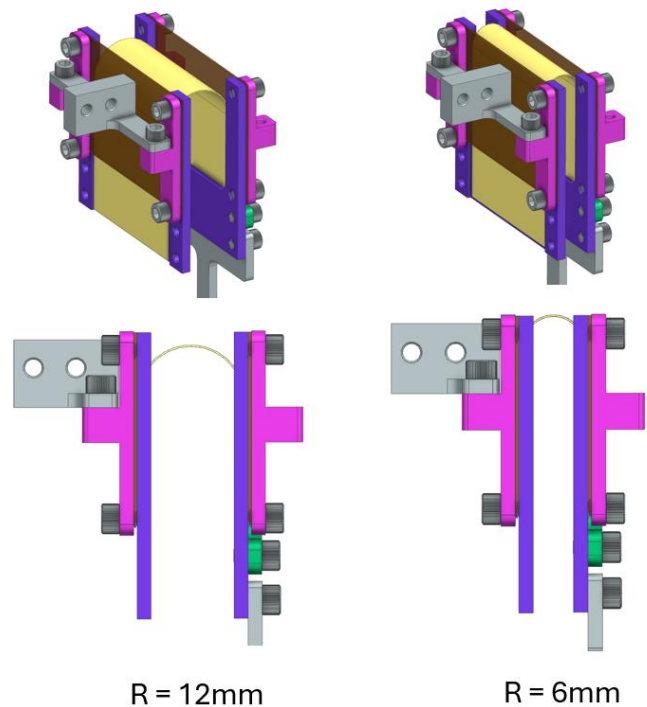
Variable adjustment of bending radius using Horizontal Actuation
